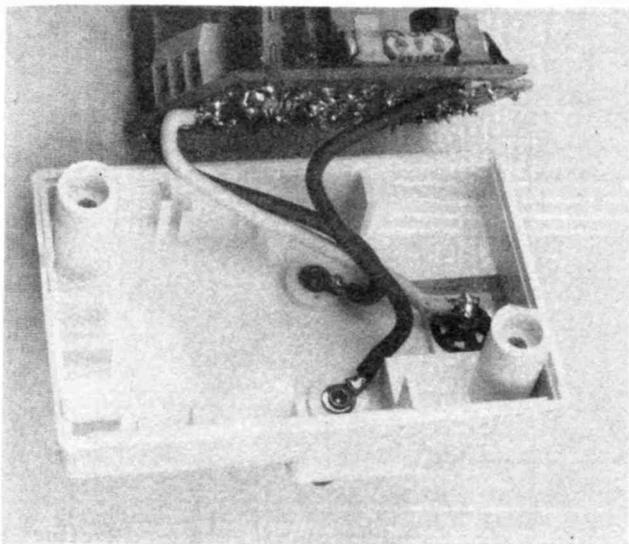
P.C.B. layout and wiring for the Kettle Alert.
